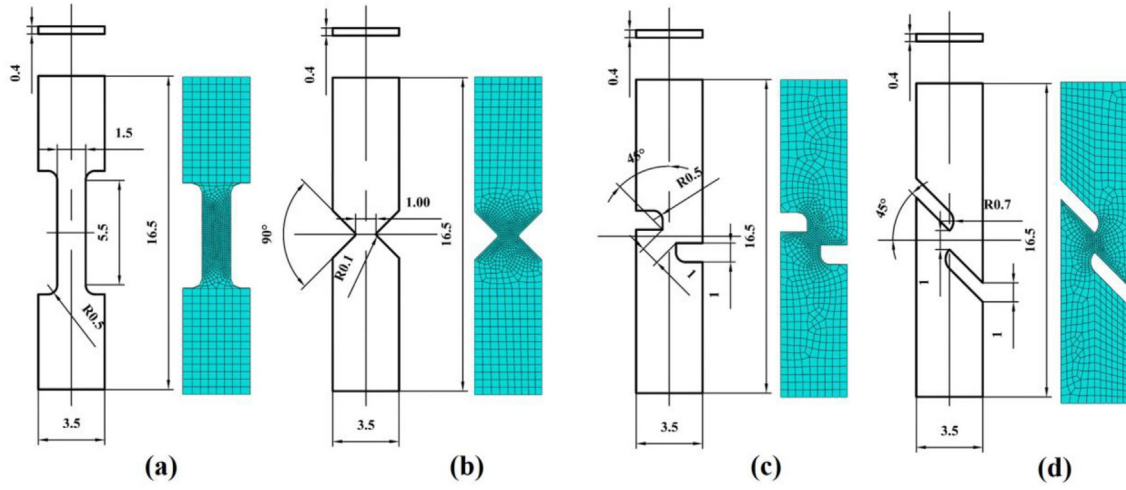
The geometrical sizes and typical meshes of different specimens. (a) Dog-bone specimen, (b) Sheet-0° specimen, (c) Sheet-45° specimen, and (d) Sheet-90° specimen. (Dimensions in mm).
